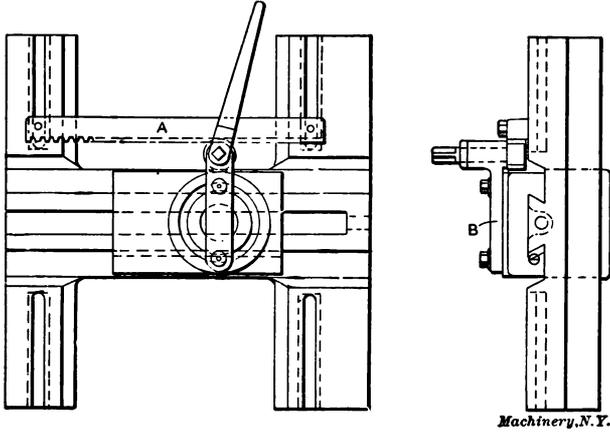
Method of Attaching Rack and Pinion to a Lathe Rest
